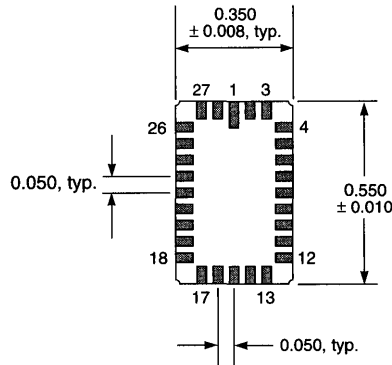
Package Dimensions (all dimensions are typical and in inches unless otherwise specified)
